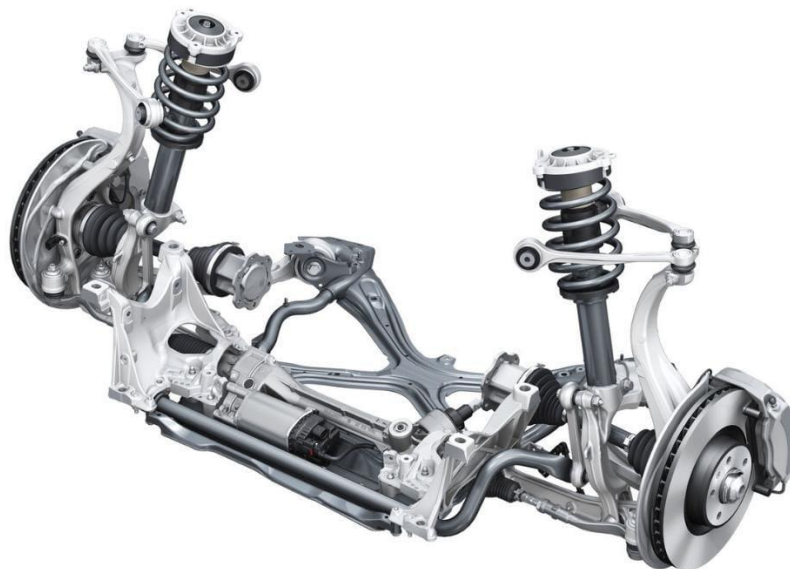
Axel assembly of cars made by dissimilar aluminium alloys. (Audi-mediacenter)
